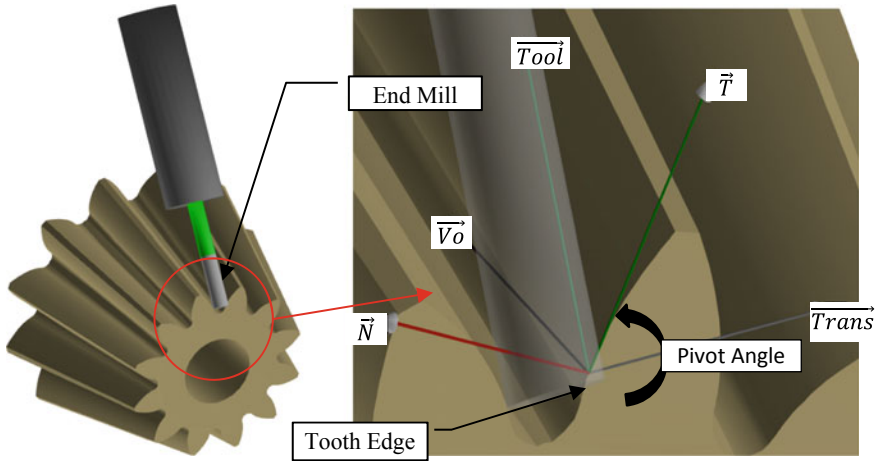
Typical end mill installation for Toe/Heel chamfering—spur and straight bevel gears
